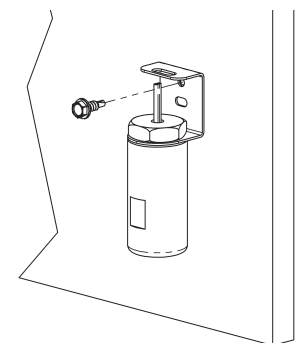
Hanging Bracket Wall Installation (Customer Provided Screws)
